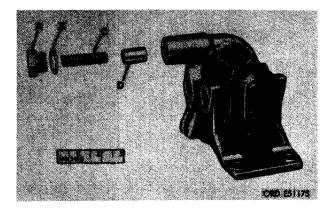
REMOVING OR INSTALLING OIL PUMP PRESSURE RELIEF VALVE.
